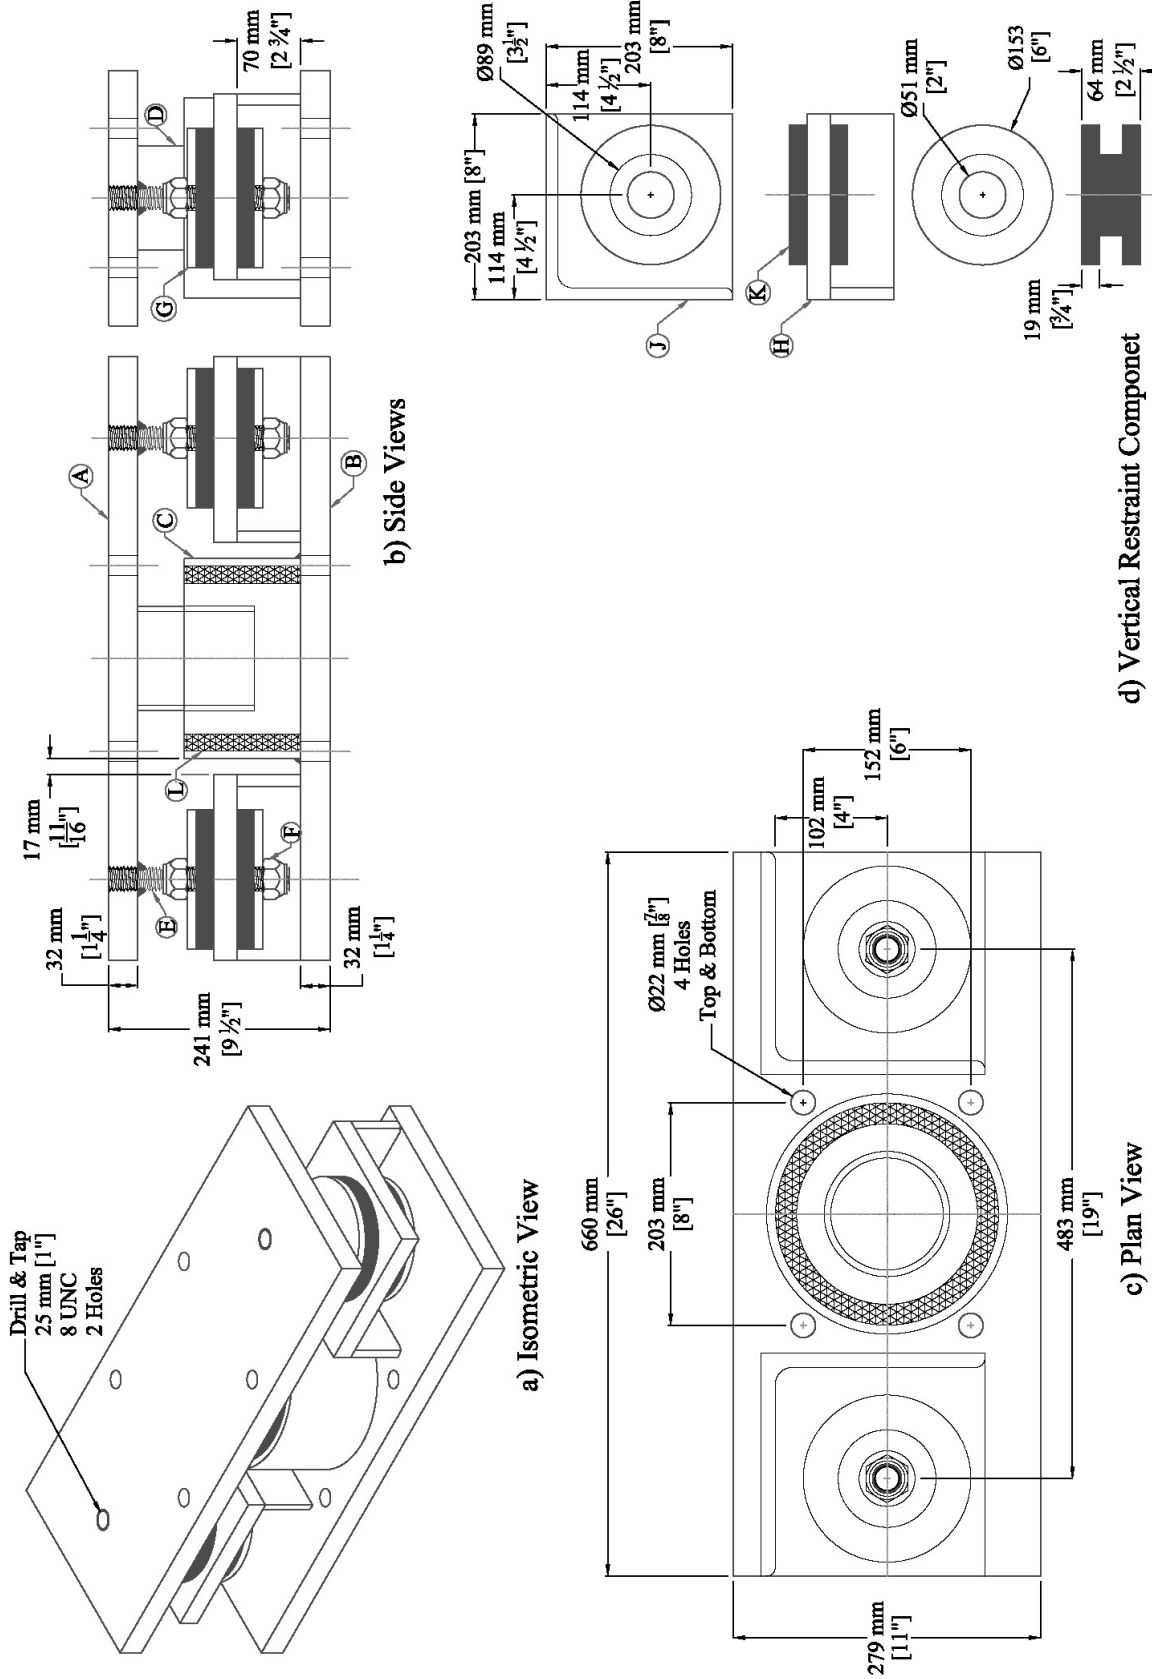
Dimensions and Details of 3.0 g Design Restraint Component (units: mm [in])
